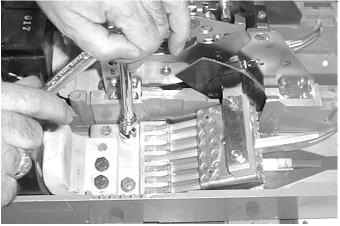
Removing the inner bolt on the C phase contact assembly to install the auxiliary switch in a 2500–4000 A breaker.
